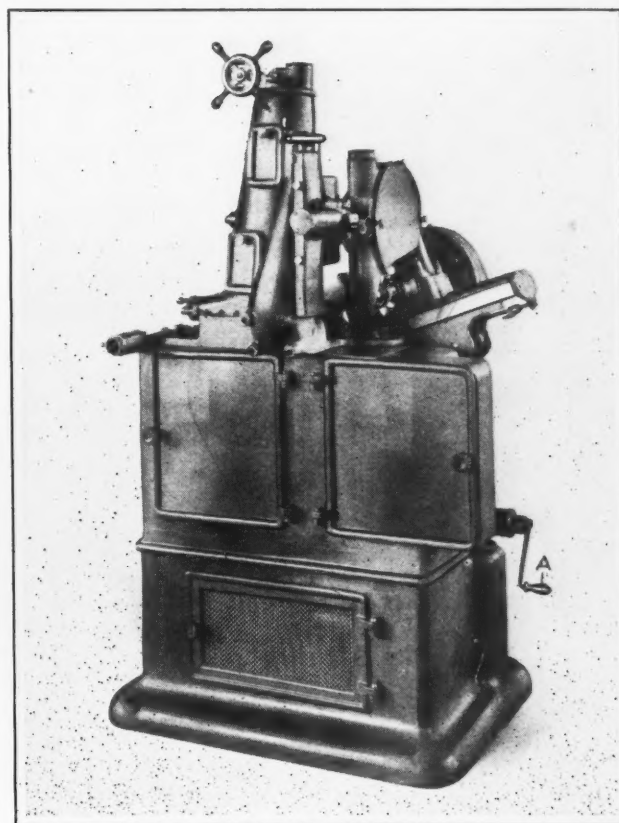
Another View of the Gear-tooth Grinder shown in Fig. 1
